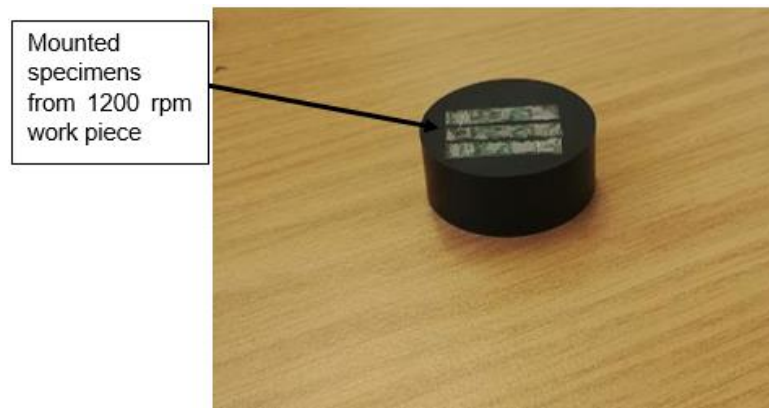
Shows three mounted specimens extracted from the start, middle and end of 1200 rpm workpiece.
